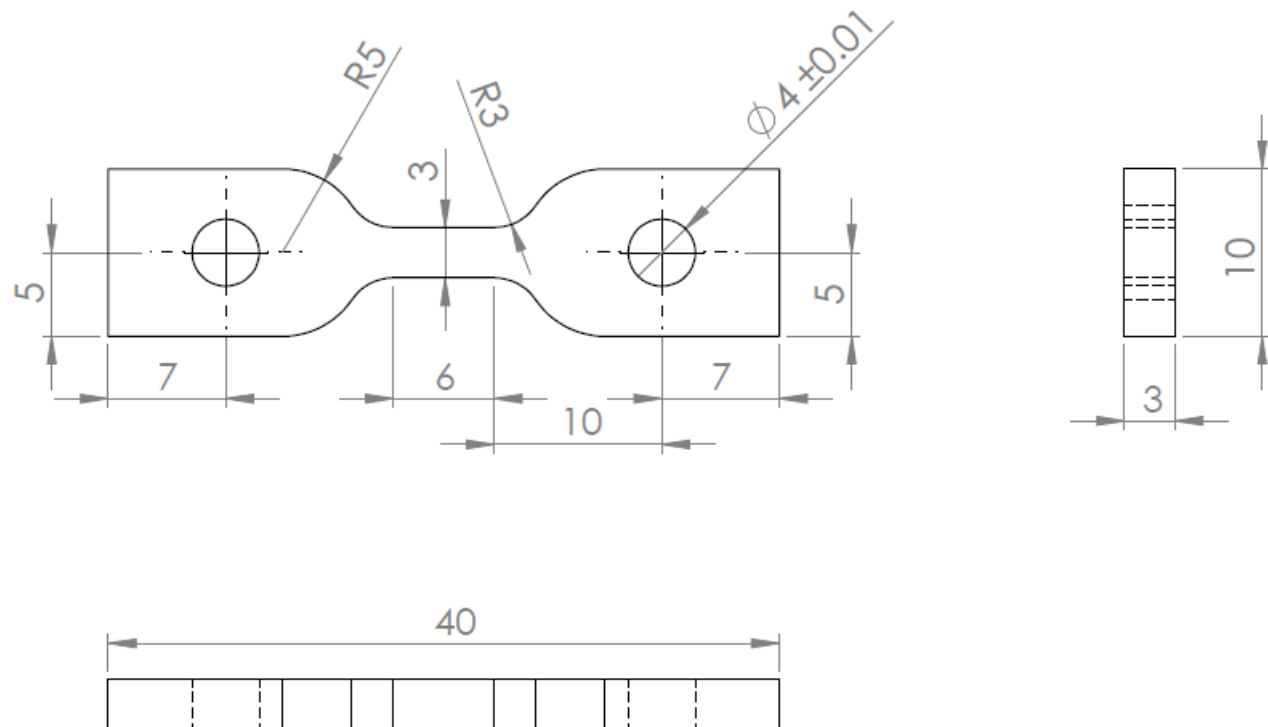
Tensile specimen dimensions (all dimensions in mm).
